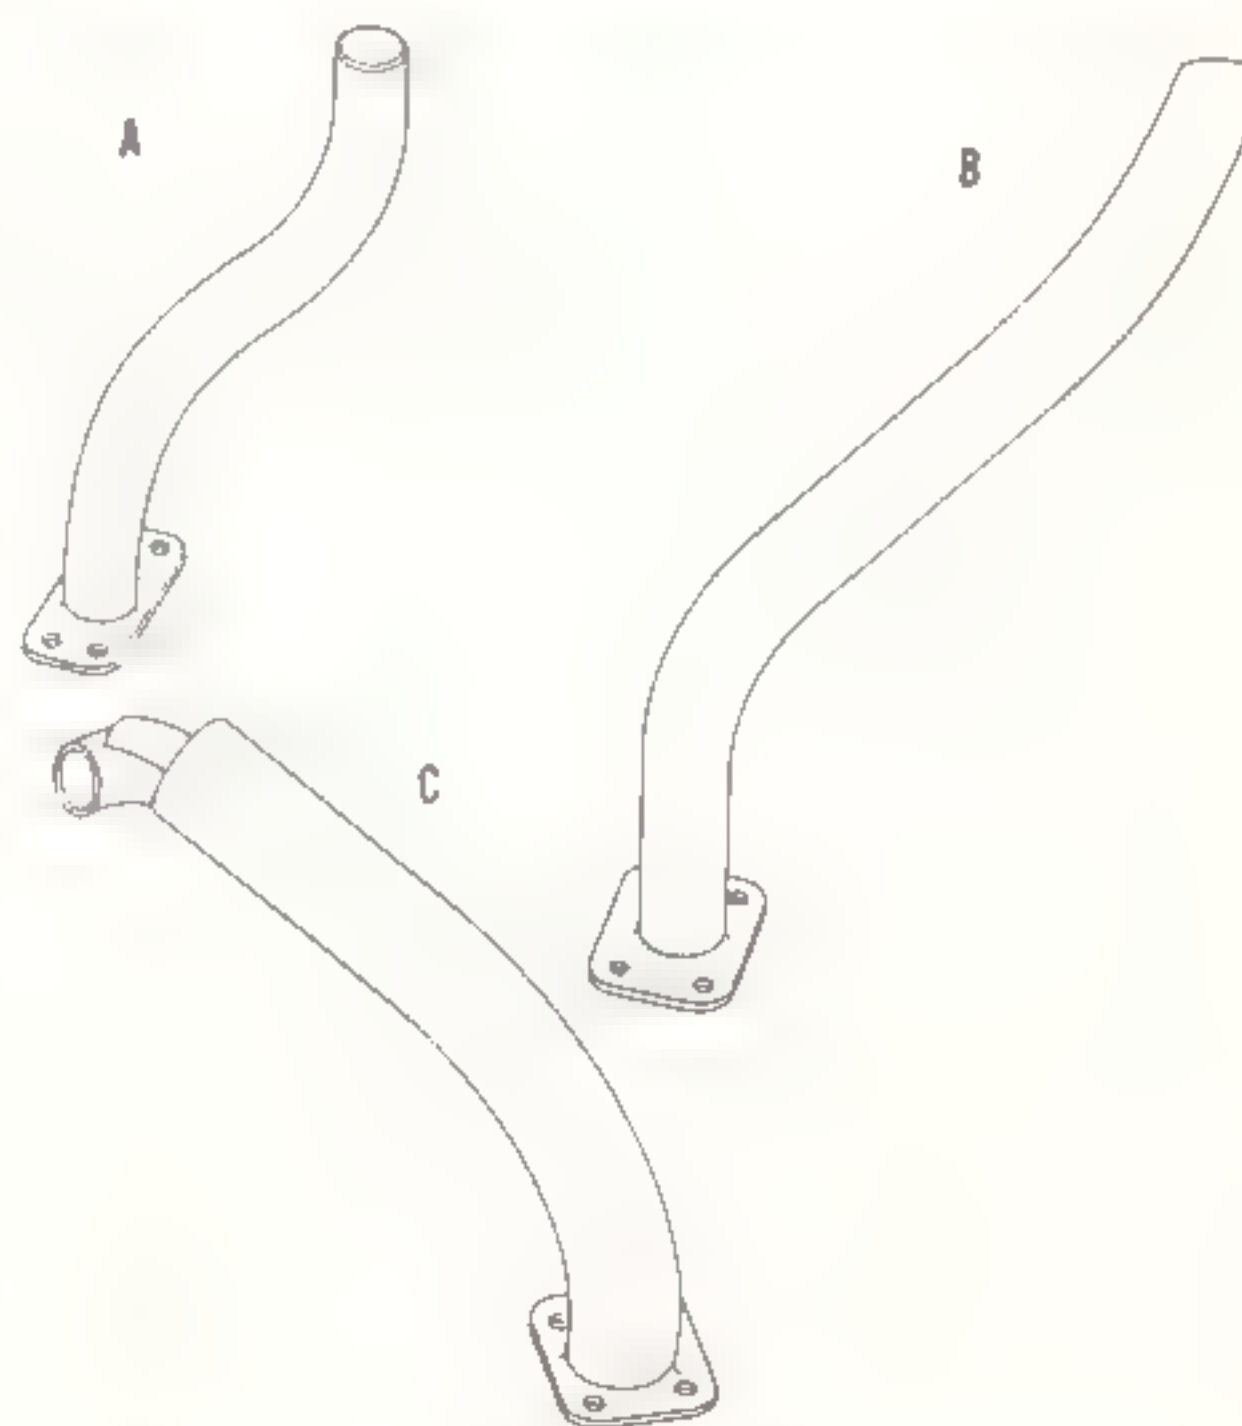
Accessory section and engine mount cooling tubes (rigid types)
